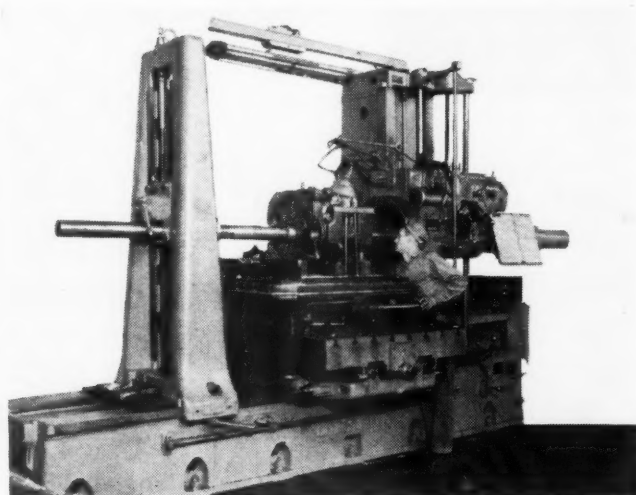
PRECISION horizontal boring mill used for accurate boring and facing of armature-bearing-housing "fits" and axle journals. The two parallel borings are accomplished in a single set-up.
